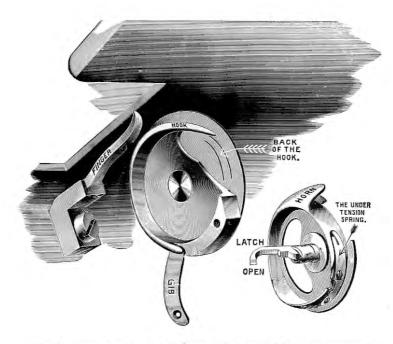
shows the Hook Gib open and the Bobbin Case removed
